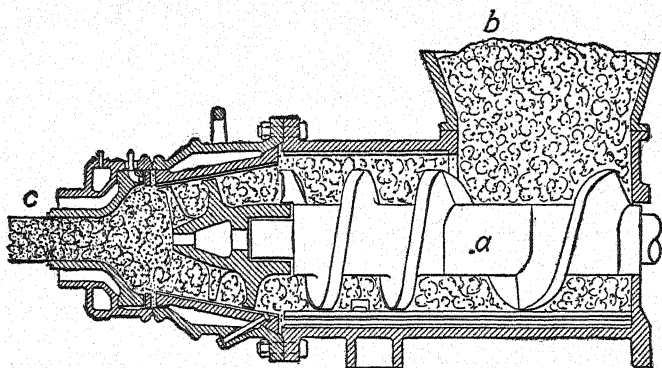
Auger brick machine. *a.* Screw or auger. *b.* Plastic clay *c.* Die for shaping clay column for bricks. (Courtesy of Chambers Brothers Company.)
